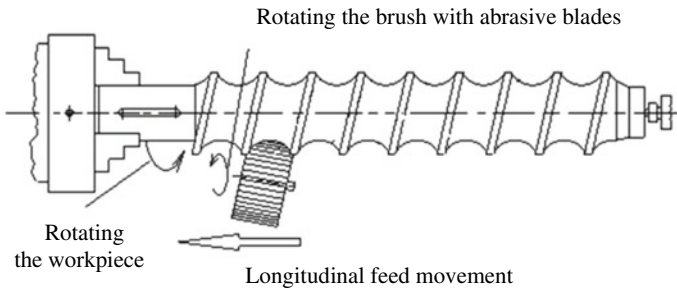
Machining scheme valid in case of polishing a helical groove using the rotating brush with abrasive blades (Adapted from [17])
